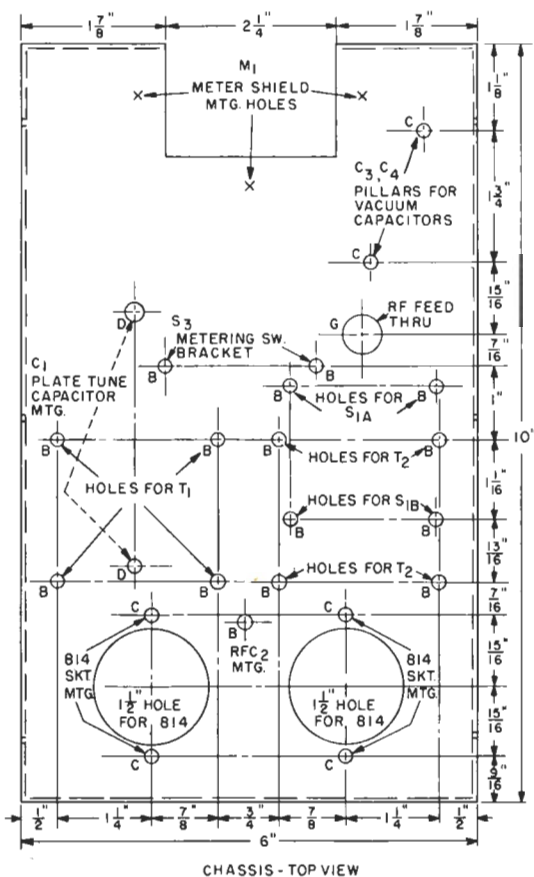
CHASSIS LAYOUT DIAGRAM, showing the actual drilling for major parts on W8DLD's model amplifier with two 6L814 pentodes. See TABLE II for the sizes of holes keyed with letters. Locations of small holes marked C₁, C₂, S₁, T₁ and T₂ are for the components actually used, and should be moved to suit components having different mounting dimensions. The cutout for M₁ should clear the connecting terminals on the back of the meter.
